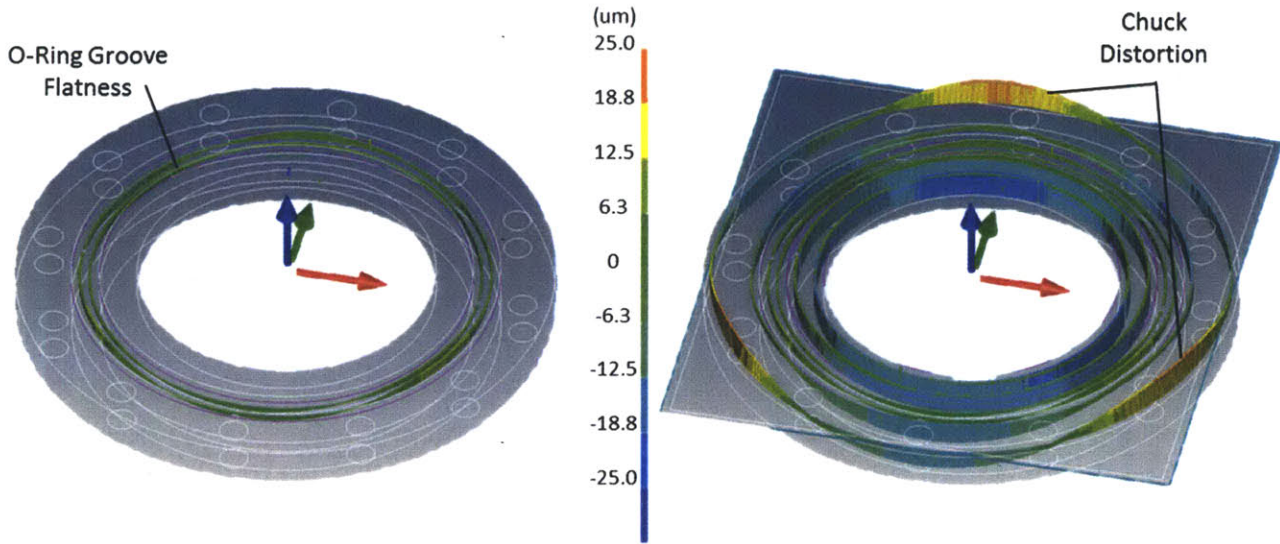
Flange flatness measurements for flange 3 showing the O-ring groove flatness profile and the overall plate flatness
